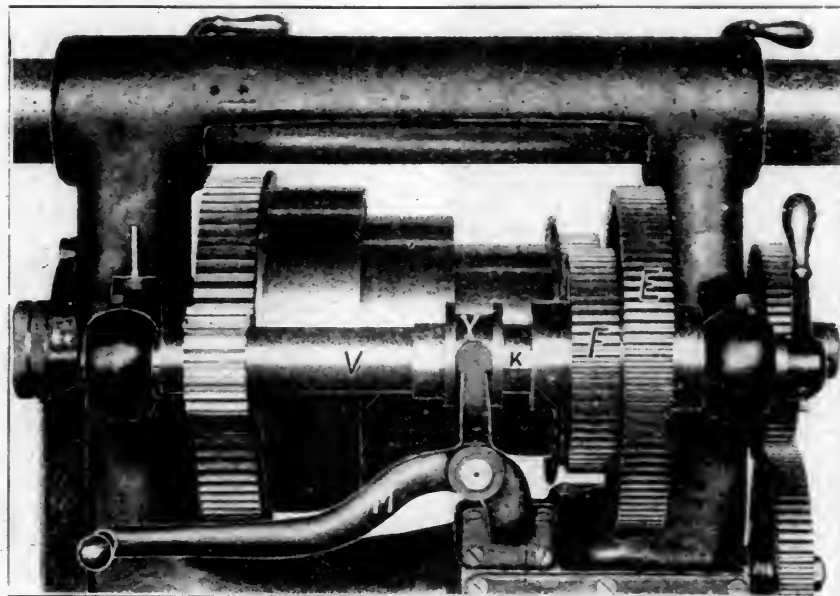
VIEW OF DOUBLE BACK-GEAR ATTACHMENT, SHOWING HANDLE FOR OPERATING THE FRICTION CLUTCHES.
